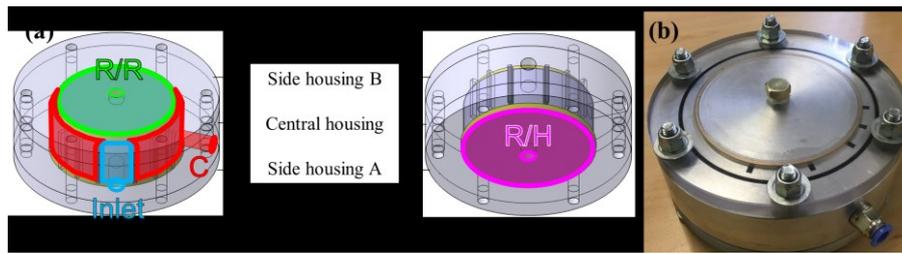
Emulated clearances (a). Manufactured non-contact sealing test chamber (b)
